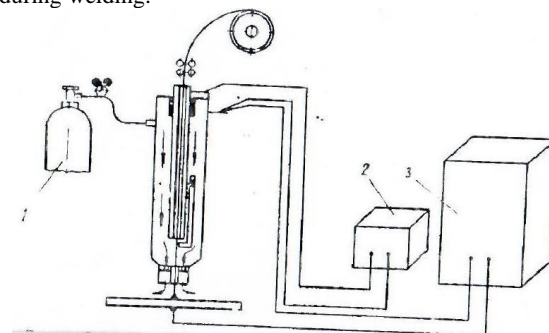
Diagram of gas-electric welding with a consumable heated electrode: 1-protective gas; 2-heating source; 3-welding source.
